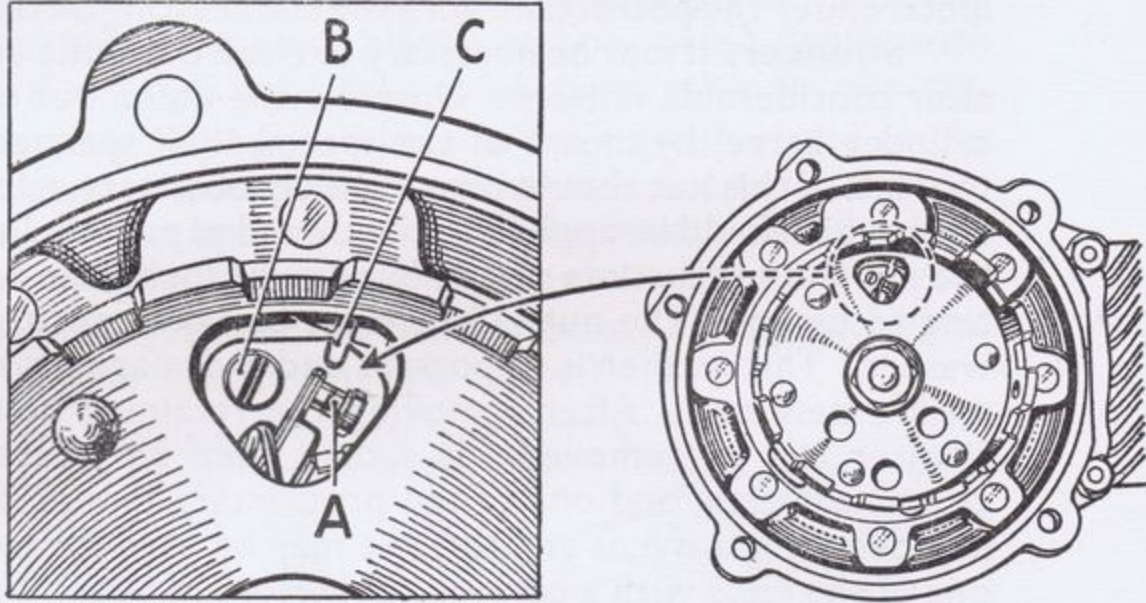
Adjusting the Contact Breaker Points (Lucas).
